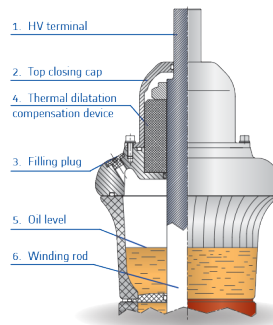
H2 head type (Bottom connection up to 170 kV - 2000 A)
